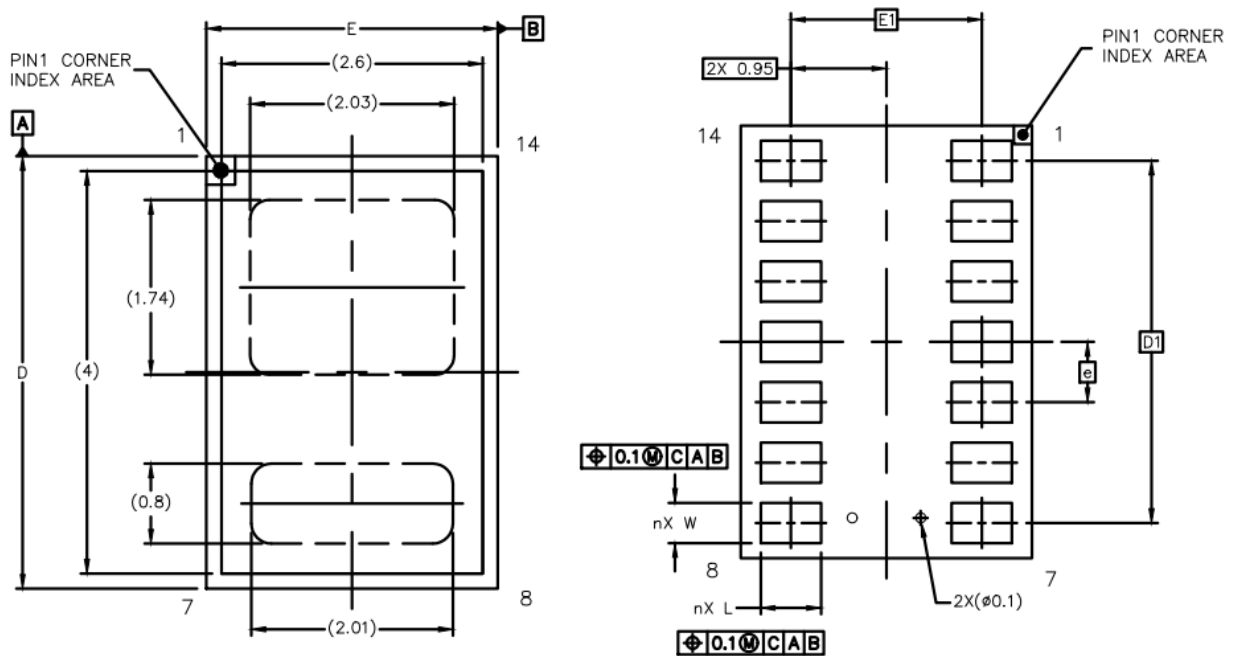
BE5.0 Sensor Drawing and Solder Pads
